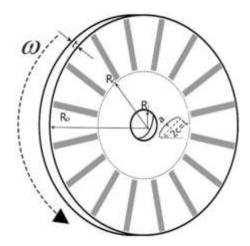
Schematic figure of an inclined crack in a grooved rotating disc
